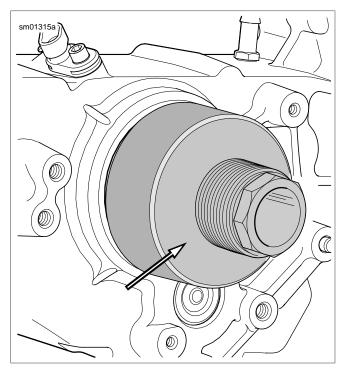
Place Installer over Adapter (typical, XL model shown)
